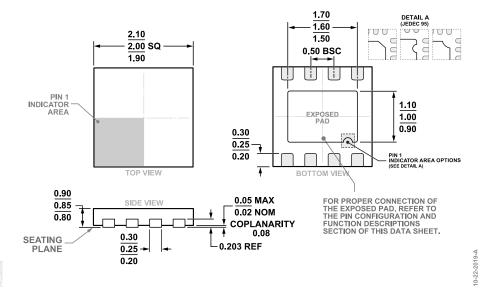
8-Lead Lead Frame Chip Scale Package [LFCSP] 2 mm × 2 mm Body and 0.85 mm Package Height (CP-8-30) Dimensions shown in millimeters
